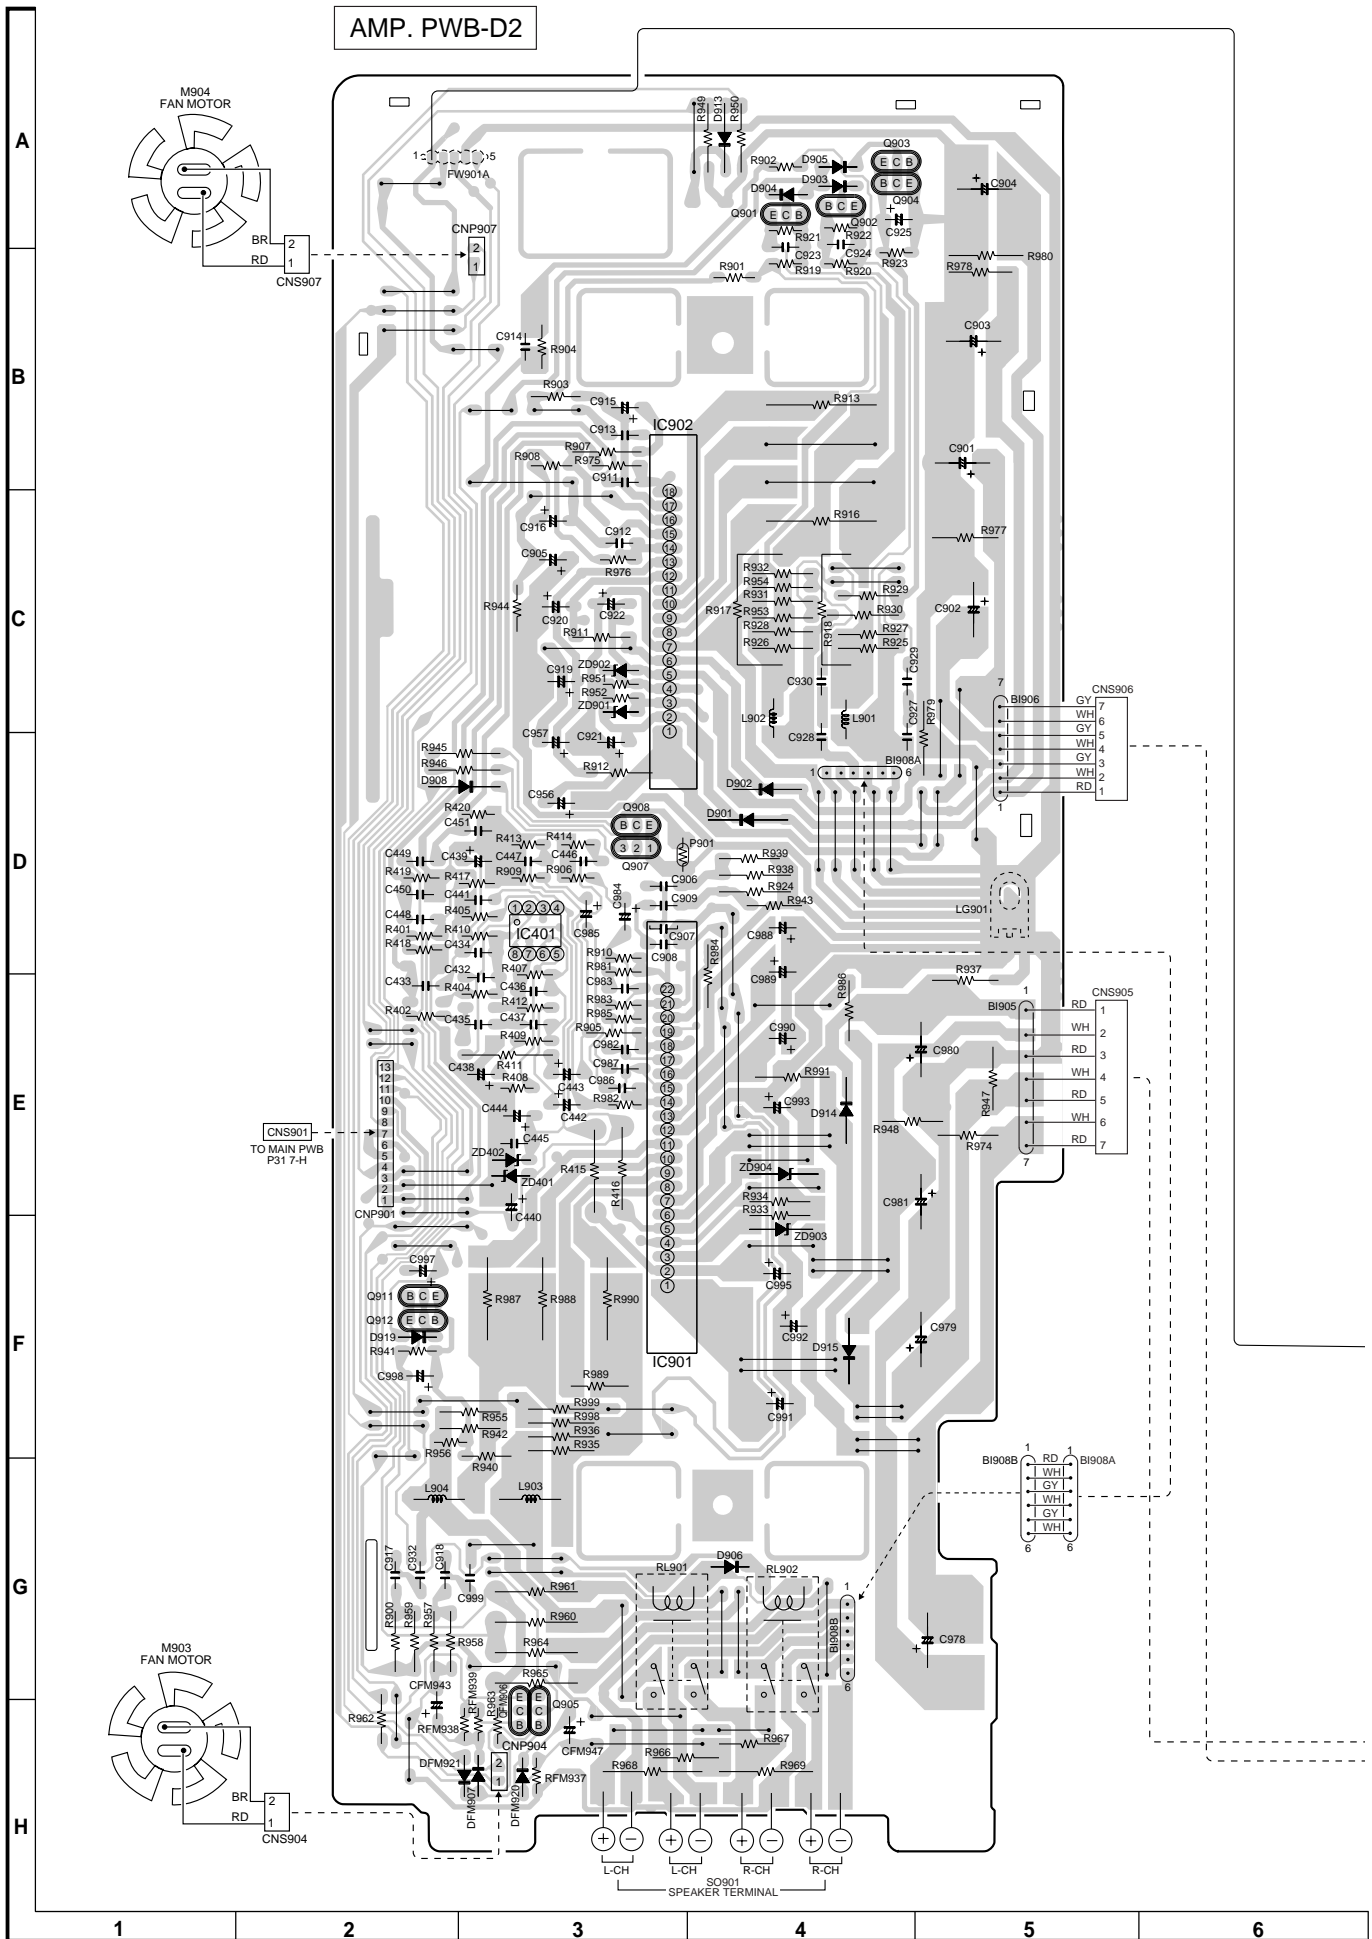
WIRING SIDE OF P.W.BOARD (6/9)
